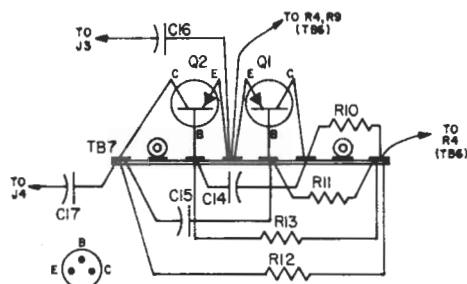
Sketch showing connections to subassembly TB7. See text.
